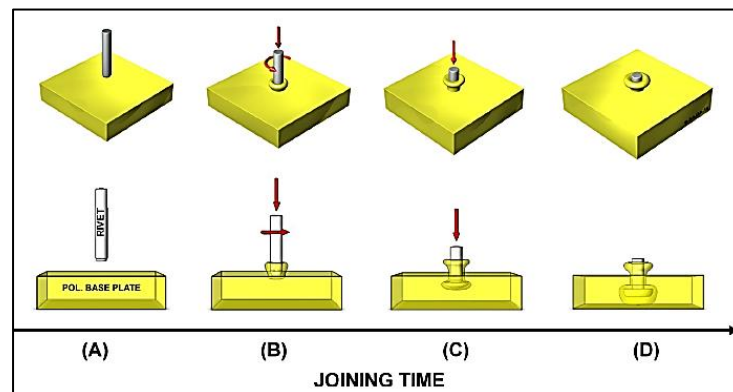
Friction Riveting [a] Positioning and clamping of joining partners, b) Insertion of rotating rivet, c) Rotation braking and subsequently rivet forging and d) Cooling and joint consolidation [27].
